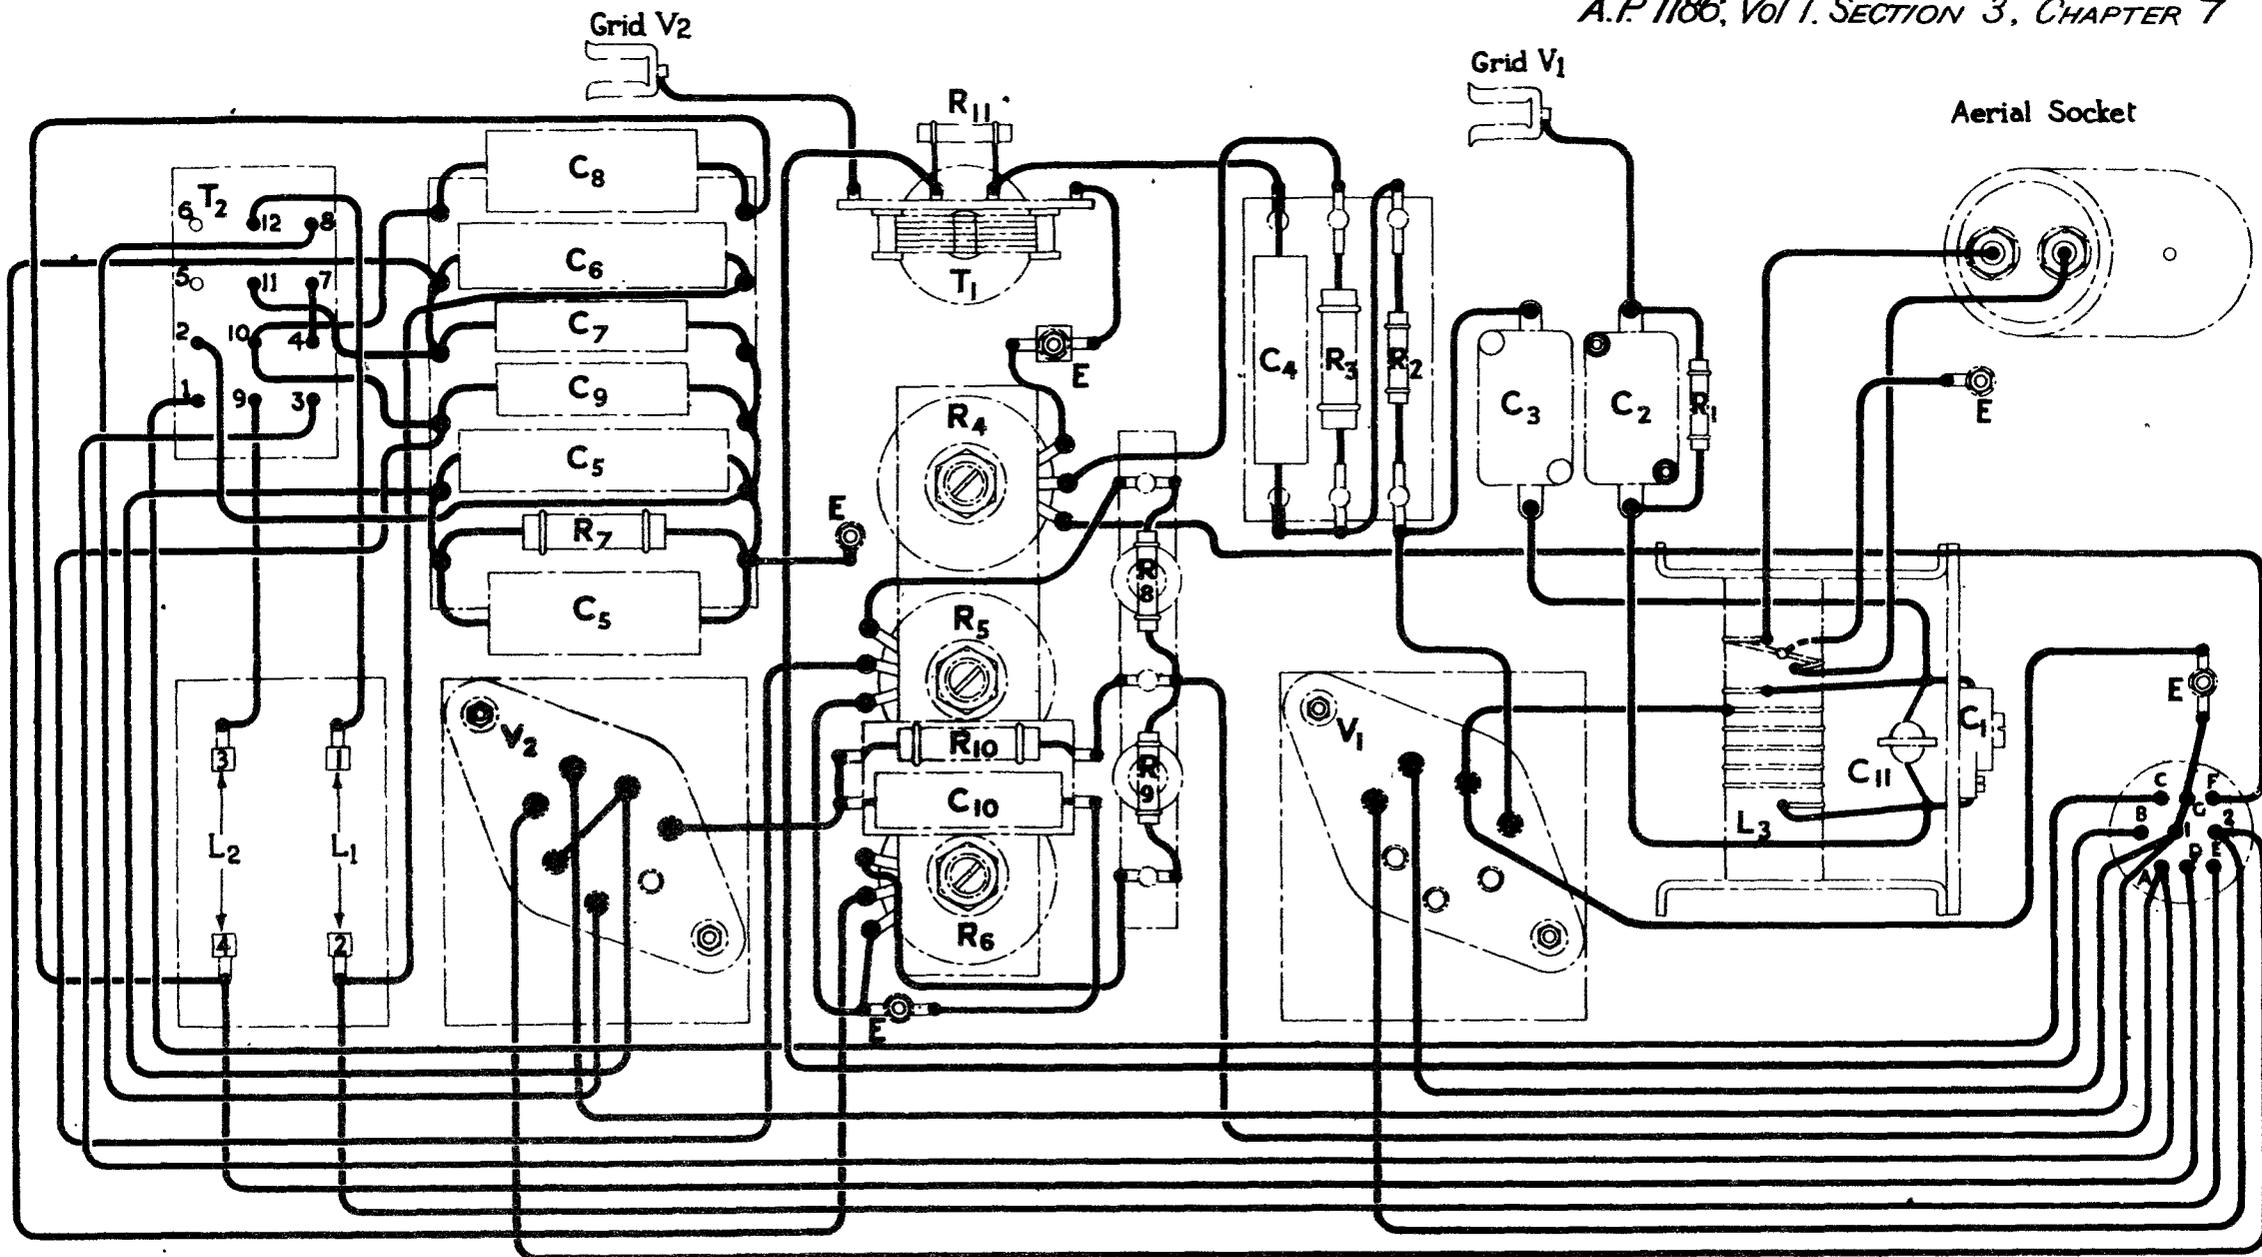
RECEIVER R.1125 A, BENCH WIRING DIAGRAM.
